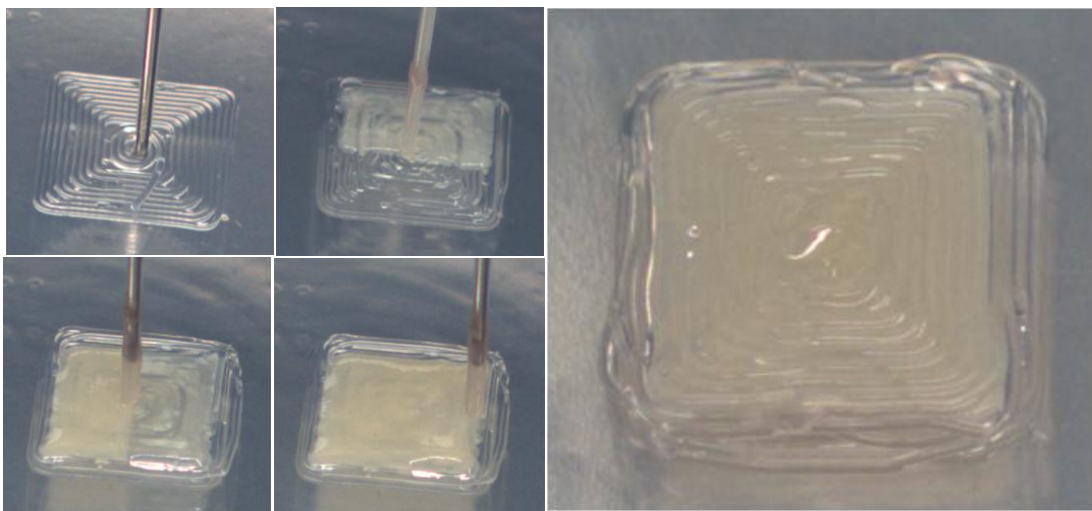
Rectangular shaped printed structure (zig-zag path)
